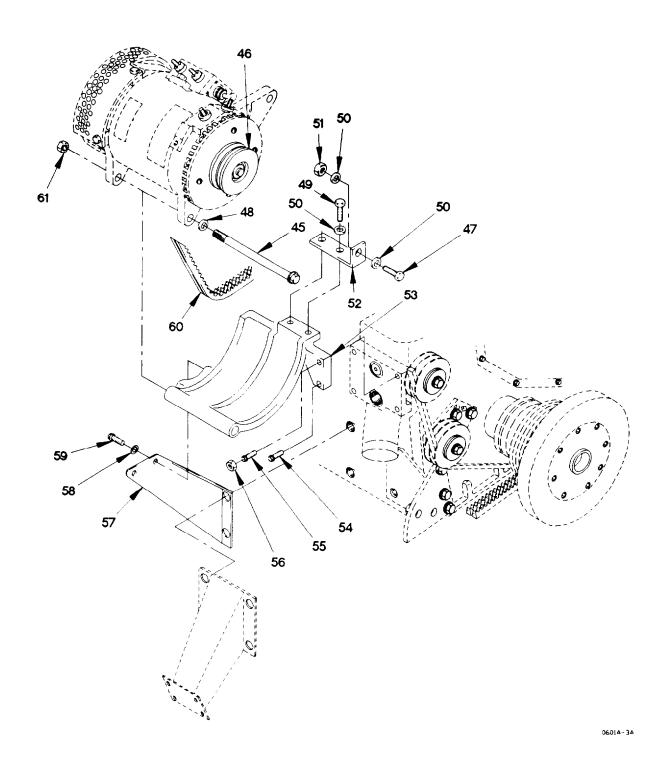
100 AMP Alternator and Regulator (Sheet 3 of 3)
